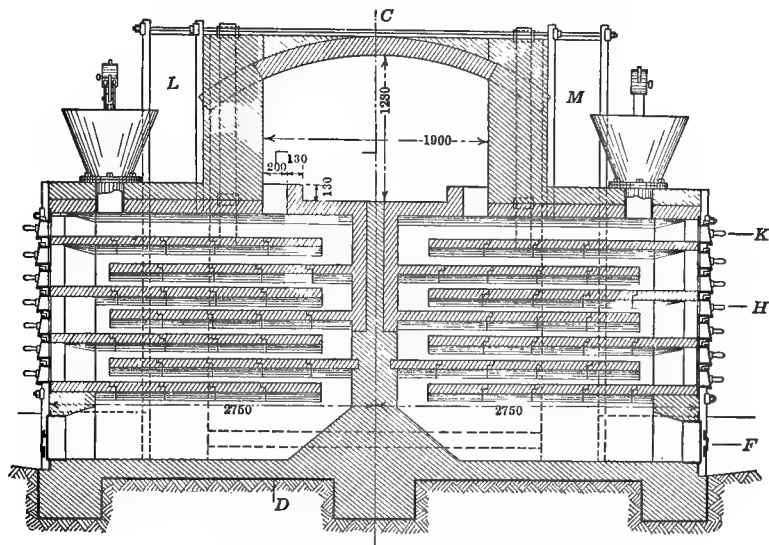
Maletra shelf-burner (dimensions in millimeters).
